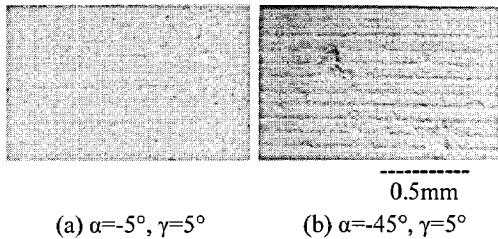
Machined surface in turning with tungsten carbide tools of different tool geometry (workpiece: presintered at 800°C, V=60m/min, f=0.1mm/rev., t=0.5mm, T=1min)
